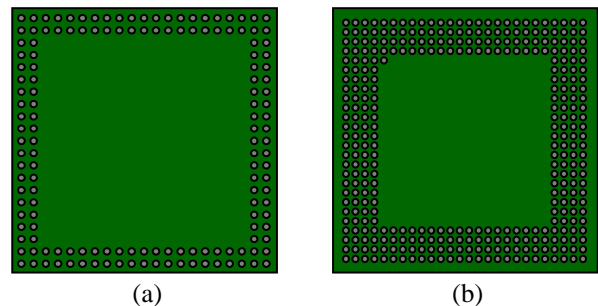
Schematic view of test packages; (a) stacked CSP for top package (b) vfbGA for bottom package
